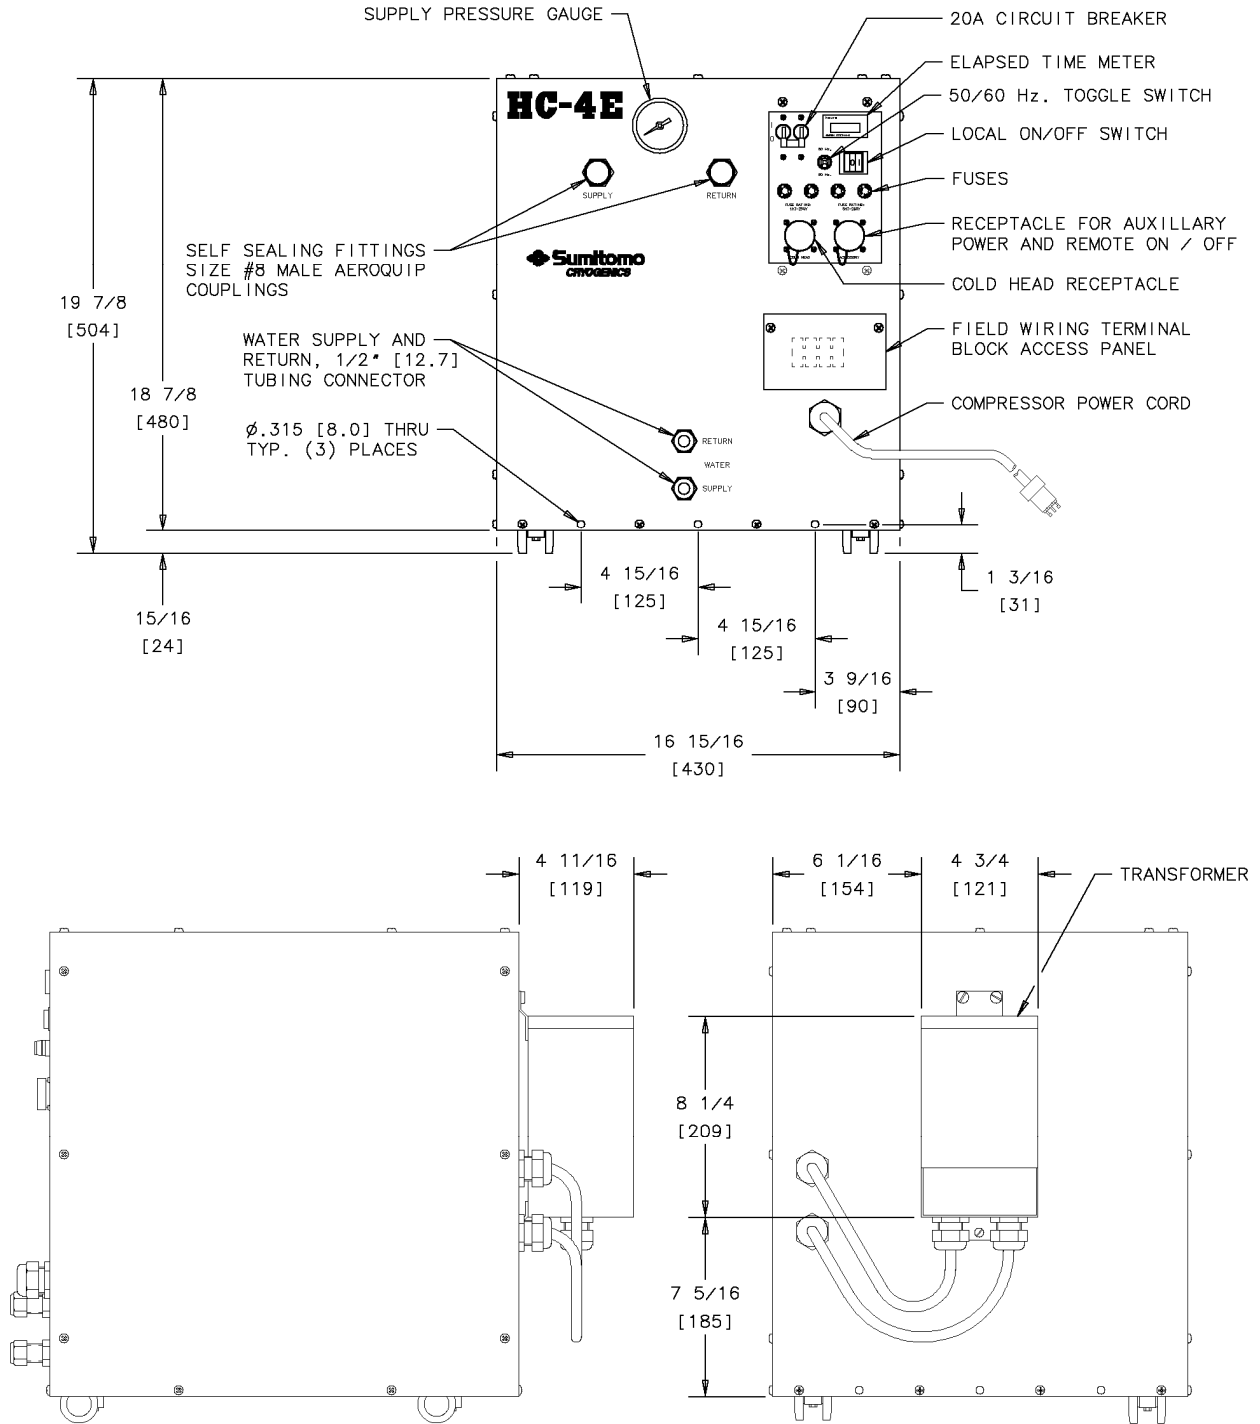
HC-4E2 Outline Dimensions and Parts Identification
